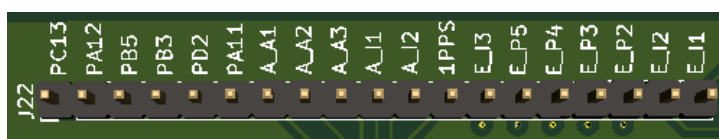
19-pin 2.54 mm pitch male header appearance on the PCB
